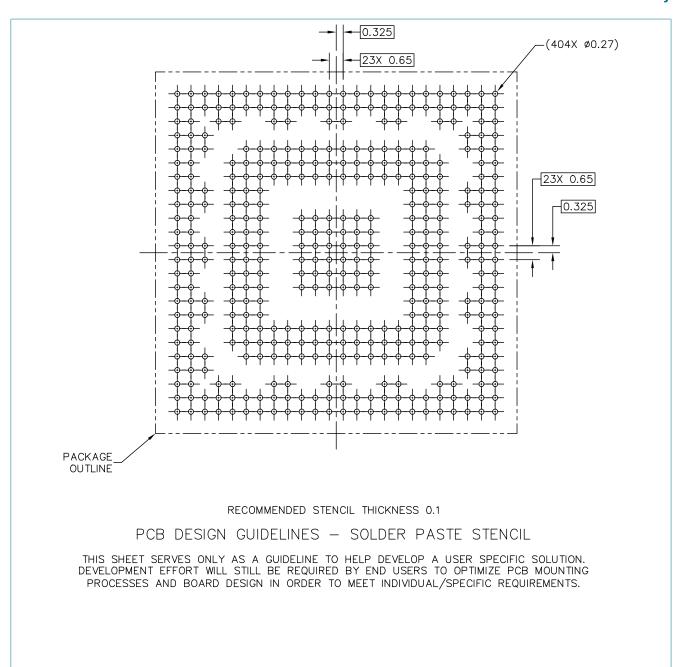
Reflow soldering footprint part2 for LFBGA404 (SOT1514-2)
